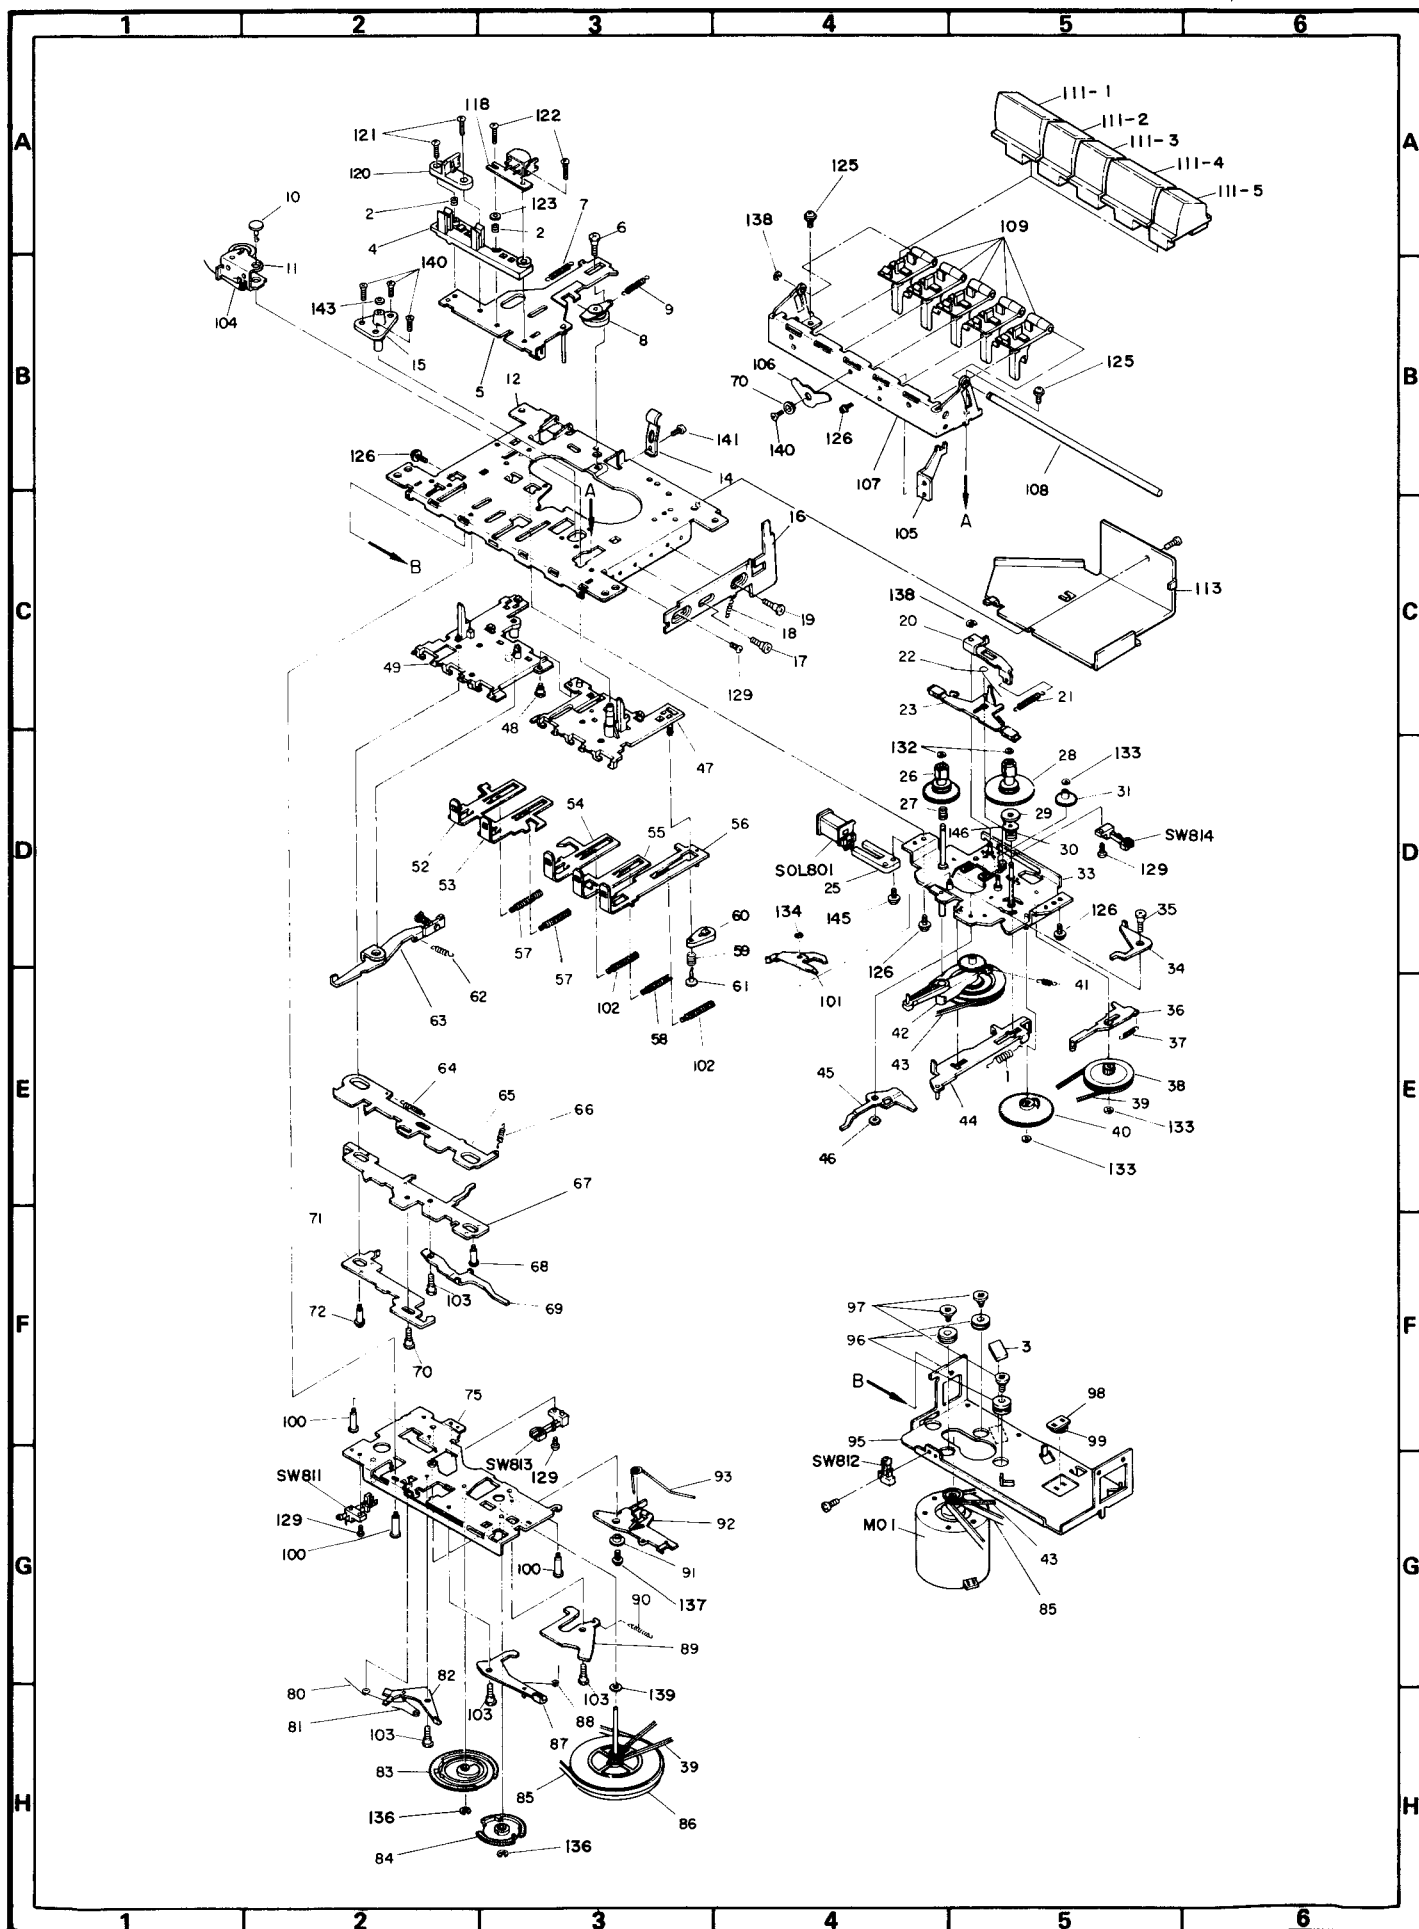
MECHANISM EXPLODED VIEW (DECK 1)
